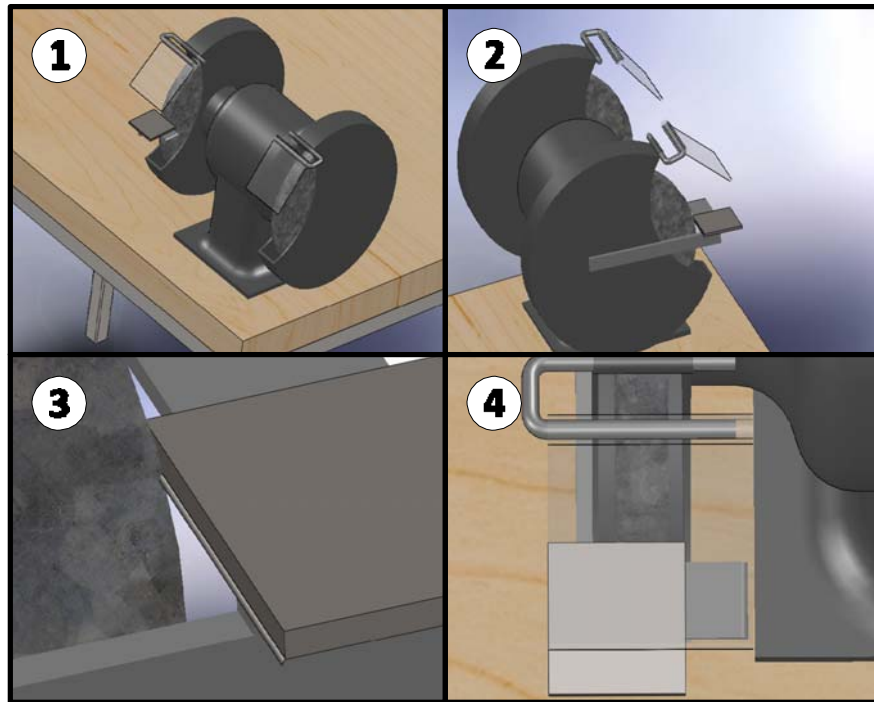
Grinding off burs- (1-2) Place the coupon on the grinder table. (3) Gently move the coupon across the abrasive wheel to remove the bur. (4) Always look through the grinder shield when using the grinder.
